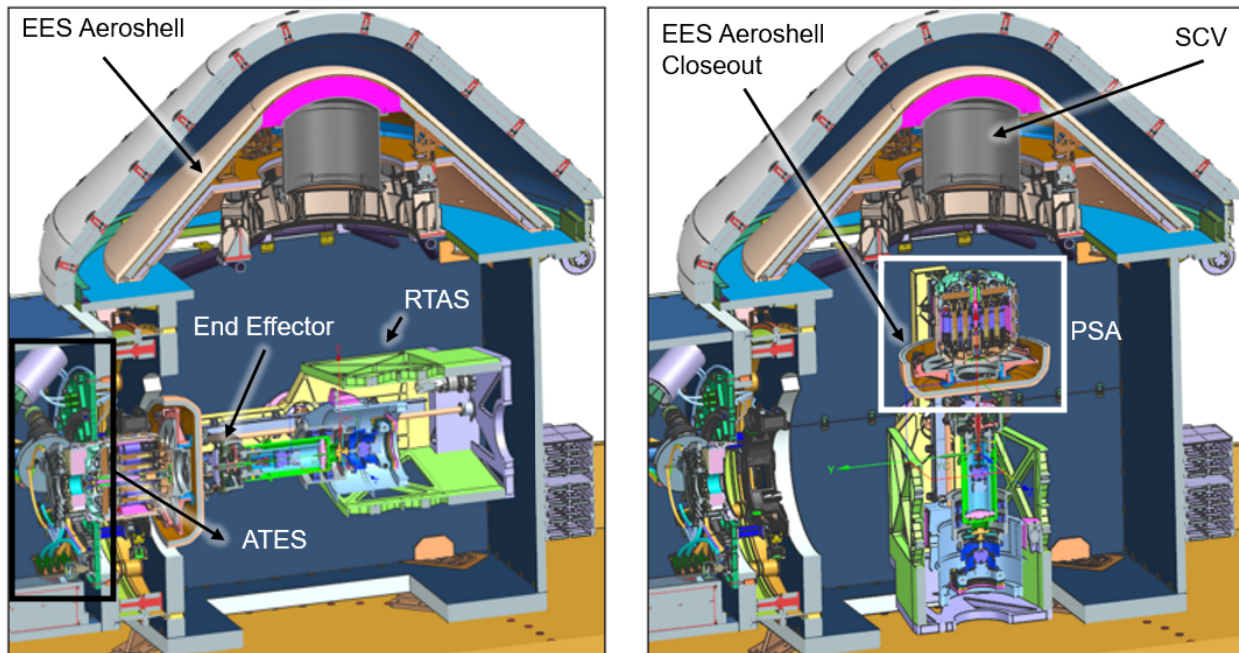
Schematic view of the EES on-orbit assembly. The Robotic Transfer Assembly System rotates to extract the samples attached to the PSA from the Capture Enclosure and install them into the EES Aeroshell at the top of the Assembly Enclosure.
